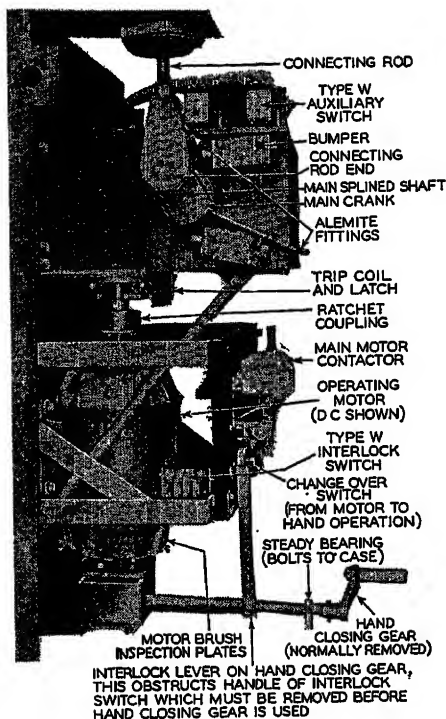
High-speed motor mechanism with "capstan" clutch, for 138-kv oil circuit breaker, side view
